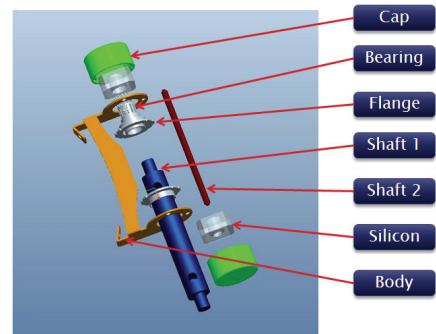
Machine elements of rotation and hinge parts for buffet ware
